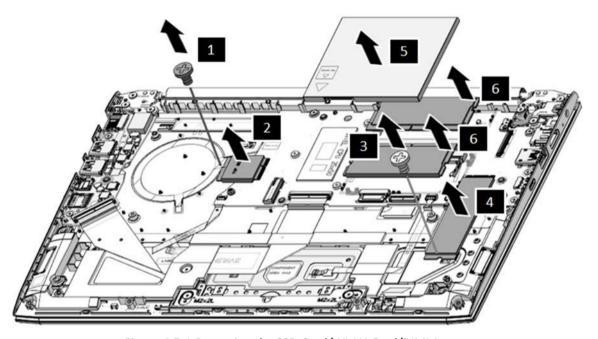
Removing the SSD Card/WLAN Card/DIMM
